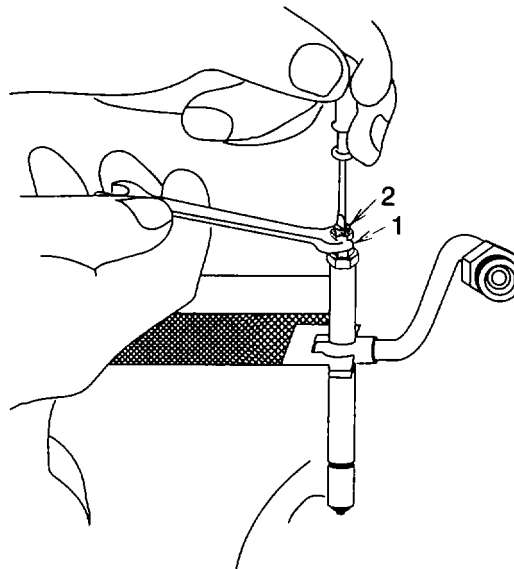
Nozzle Pressure Lift Adjusting Screw
